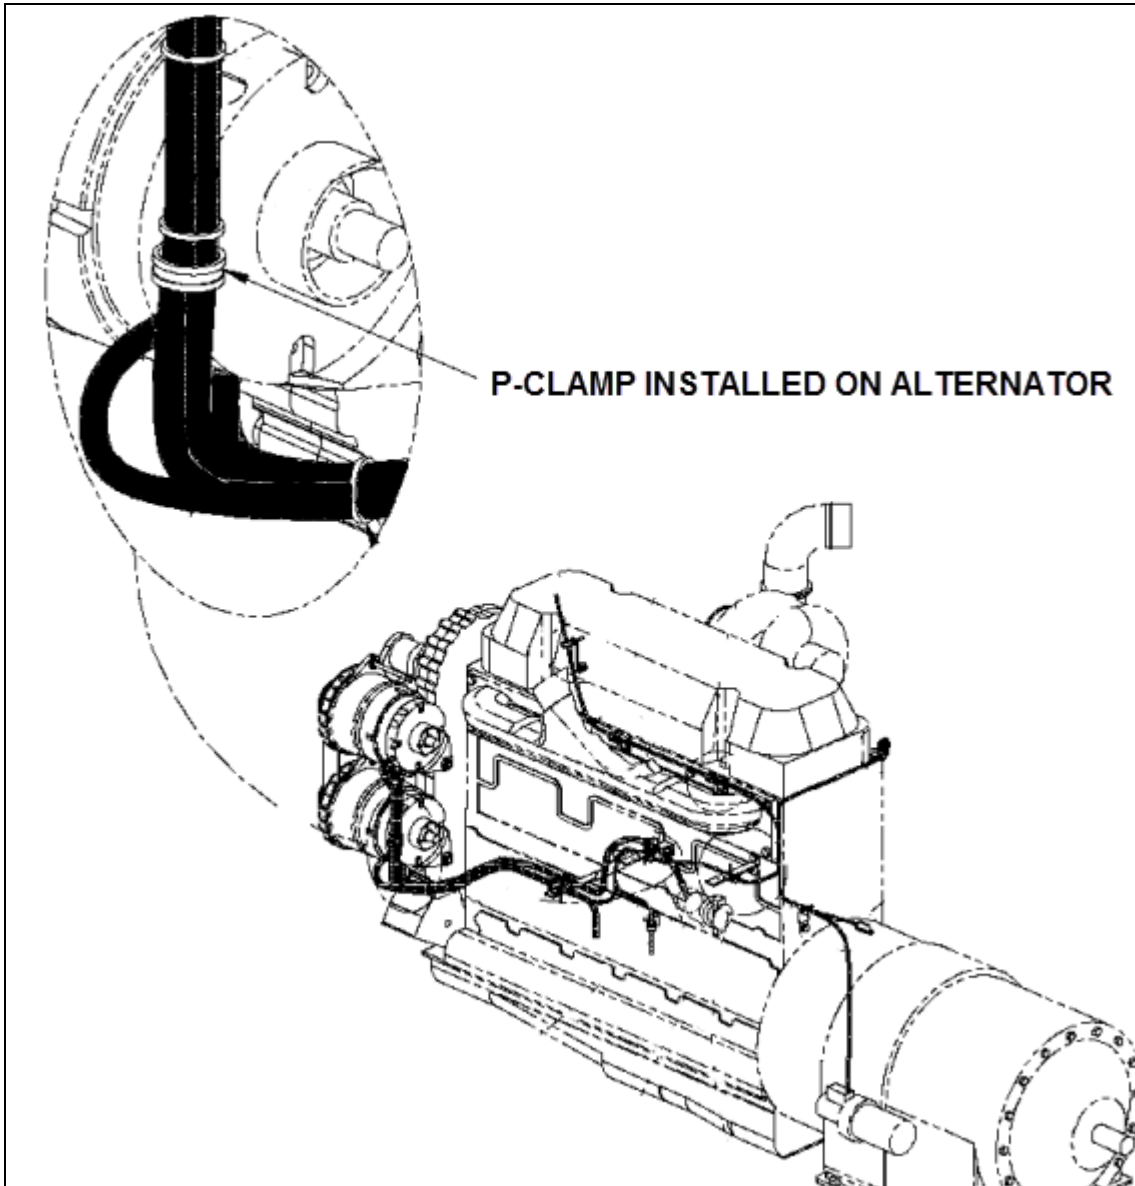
Details of the P-Clamp installation on the lower BOSCH T1 alternator
